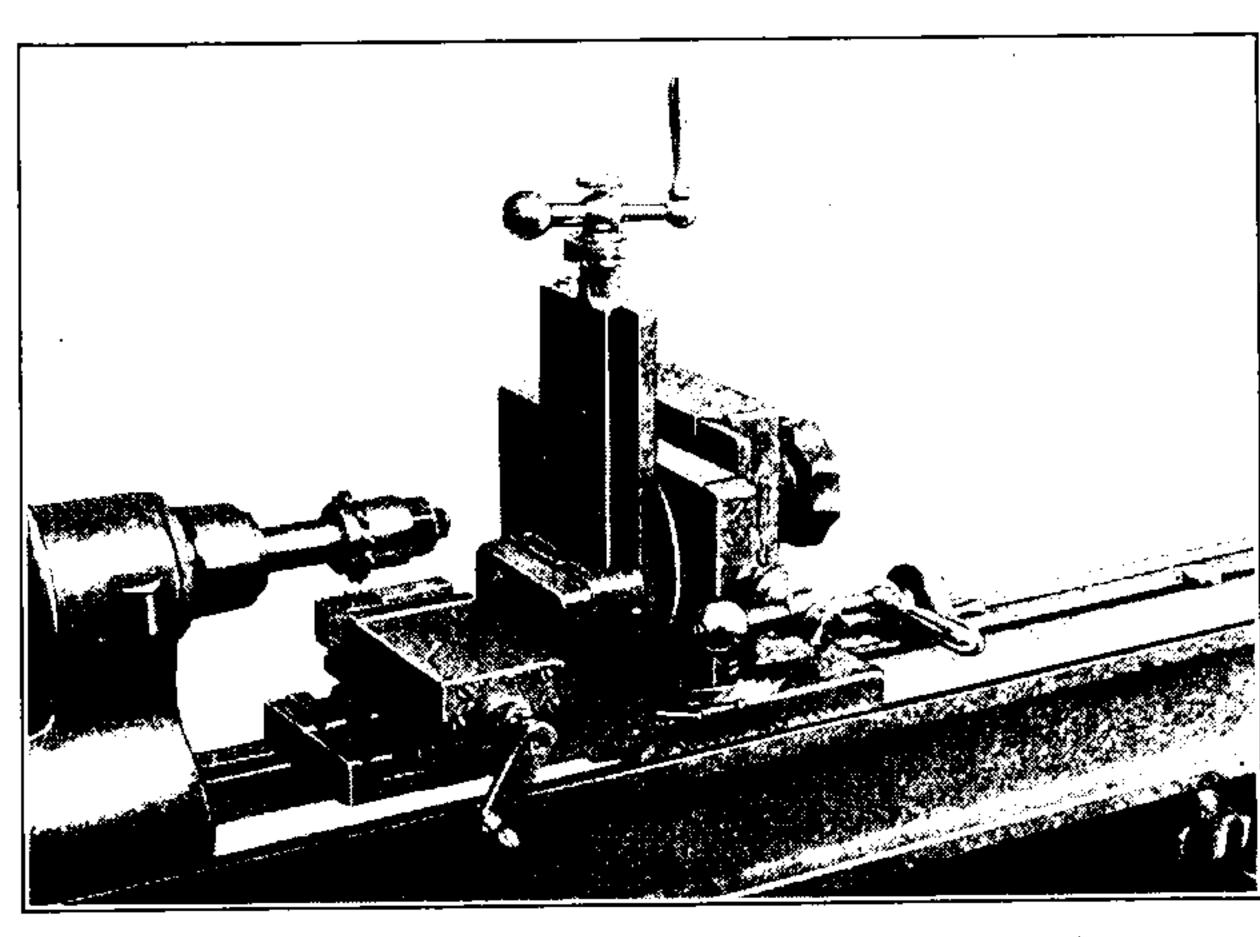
Milling Attachment with Angle Iron and Vise set as plain miller for milling teeth in rack
